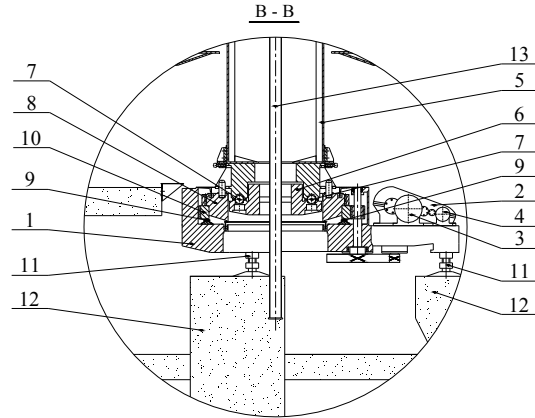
Azimuthal axle and the fixed base platform with foundation.
